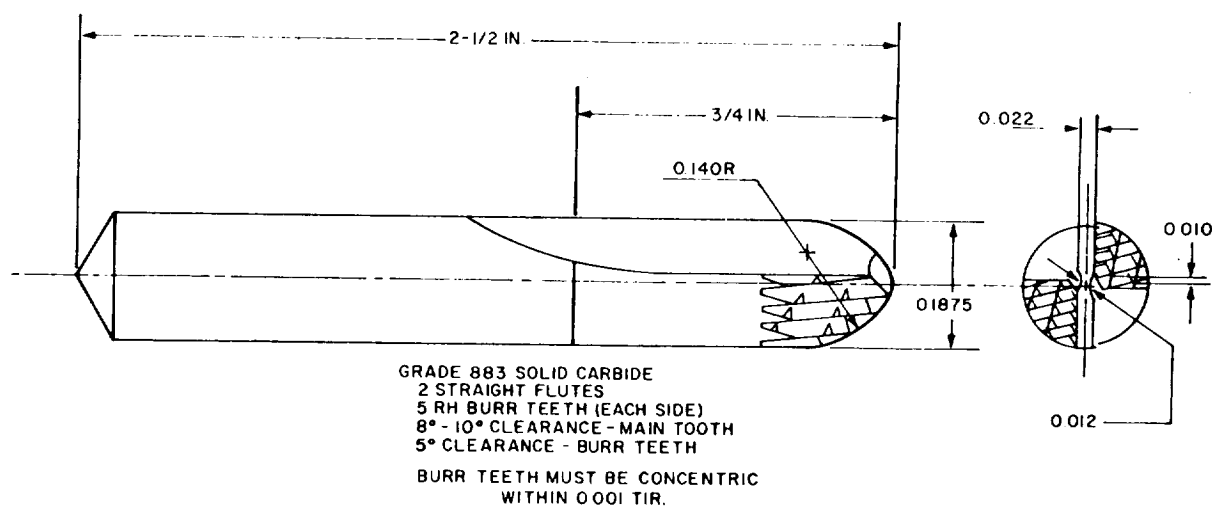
Drill Configuration for Recently Developed Burr-Tooth Drill⁴⁸
